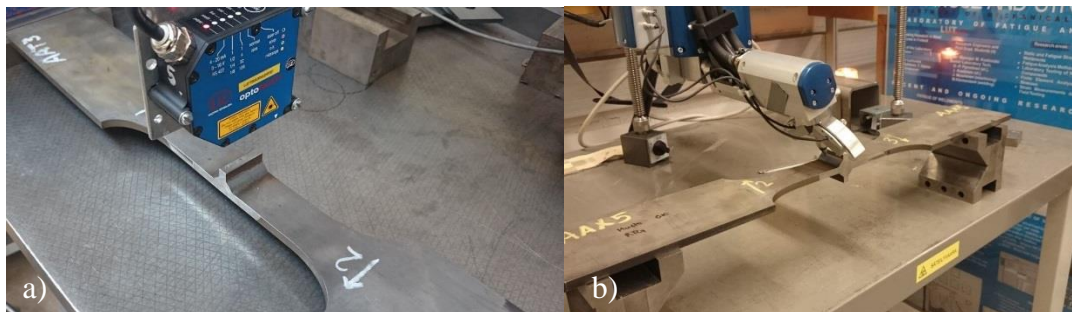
Measurement of (a) weld shape and (b) residual stress.
